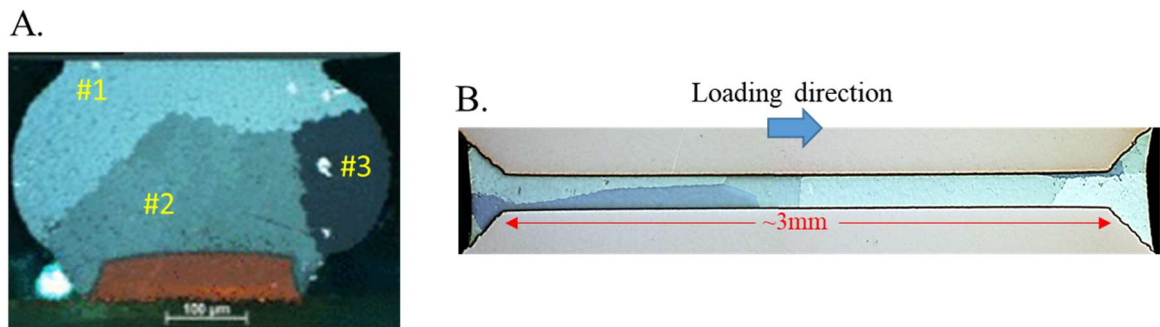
A.) Ball grid array solder joint [49]; B.) TMM Shear M0 specimen [50]
